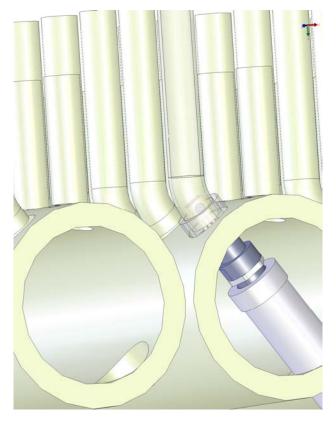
A closer view of the schematic shown in Figure 3-25
